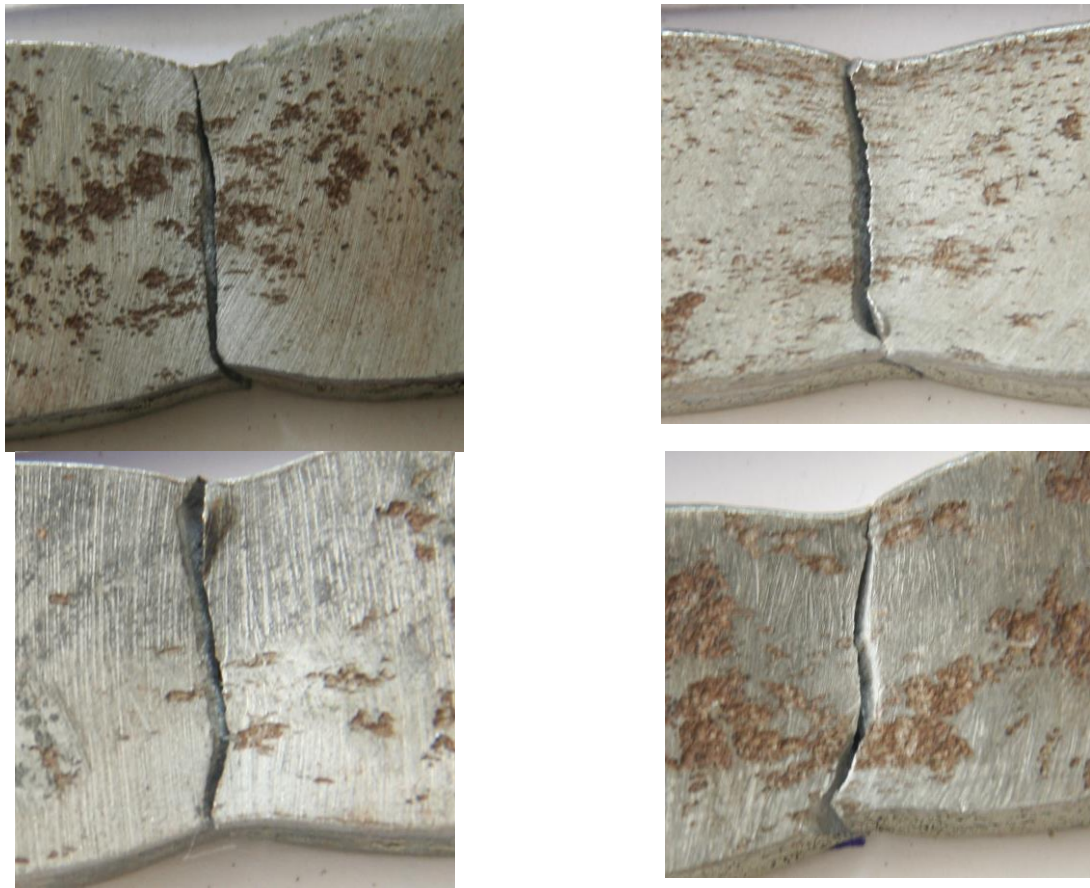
Several fracture locations of the specimens after the tensile test (No. 6, 9, 18, 25)
